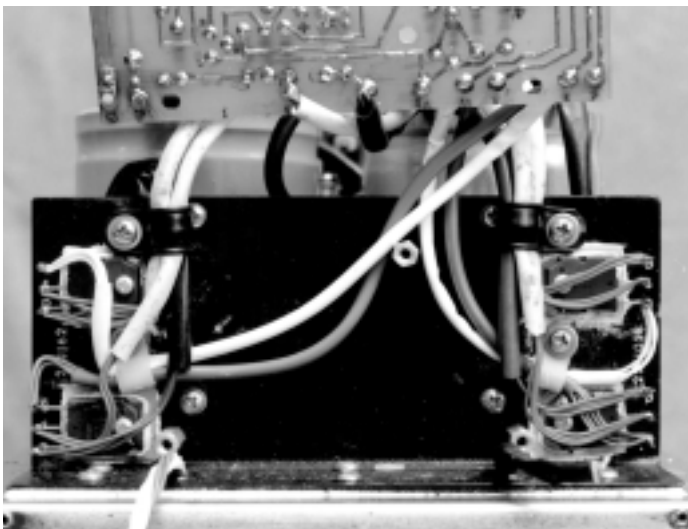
With the PC board raised, the method of clamping leads to the heatsink is visible. The killer heatsink fins are on the back side.
